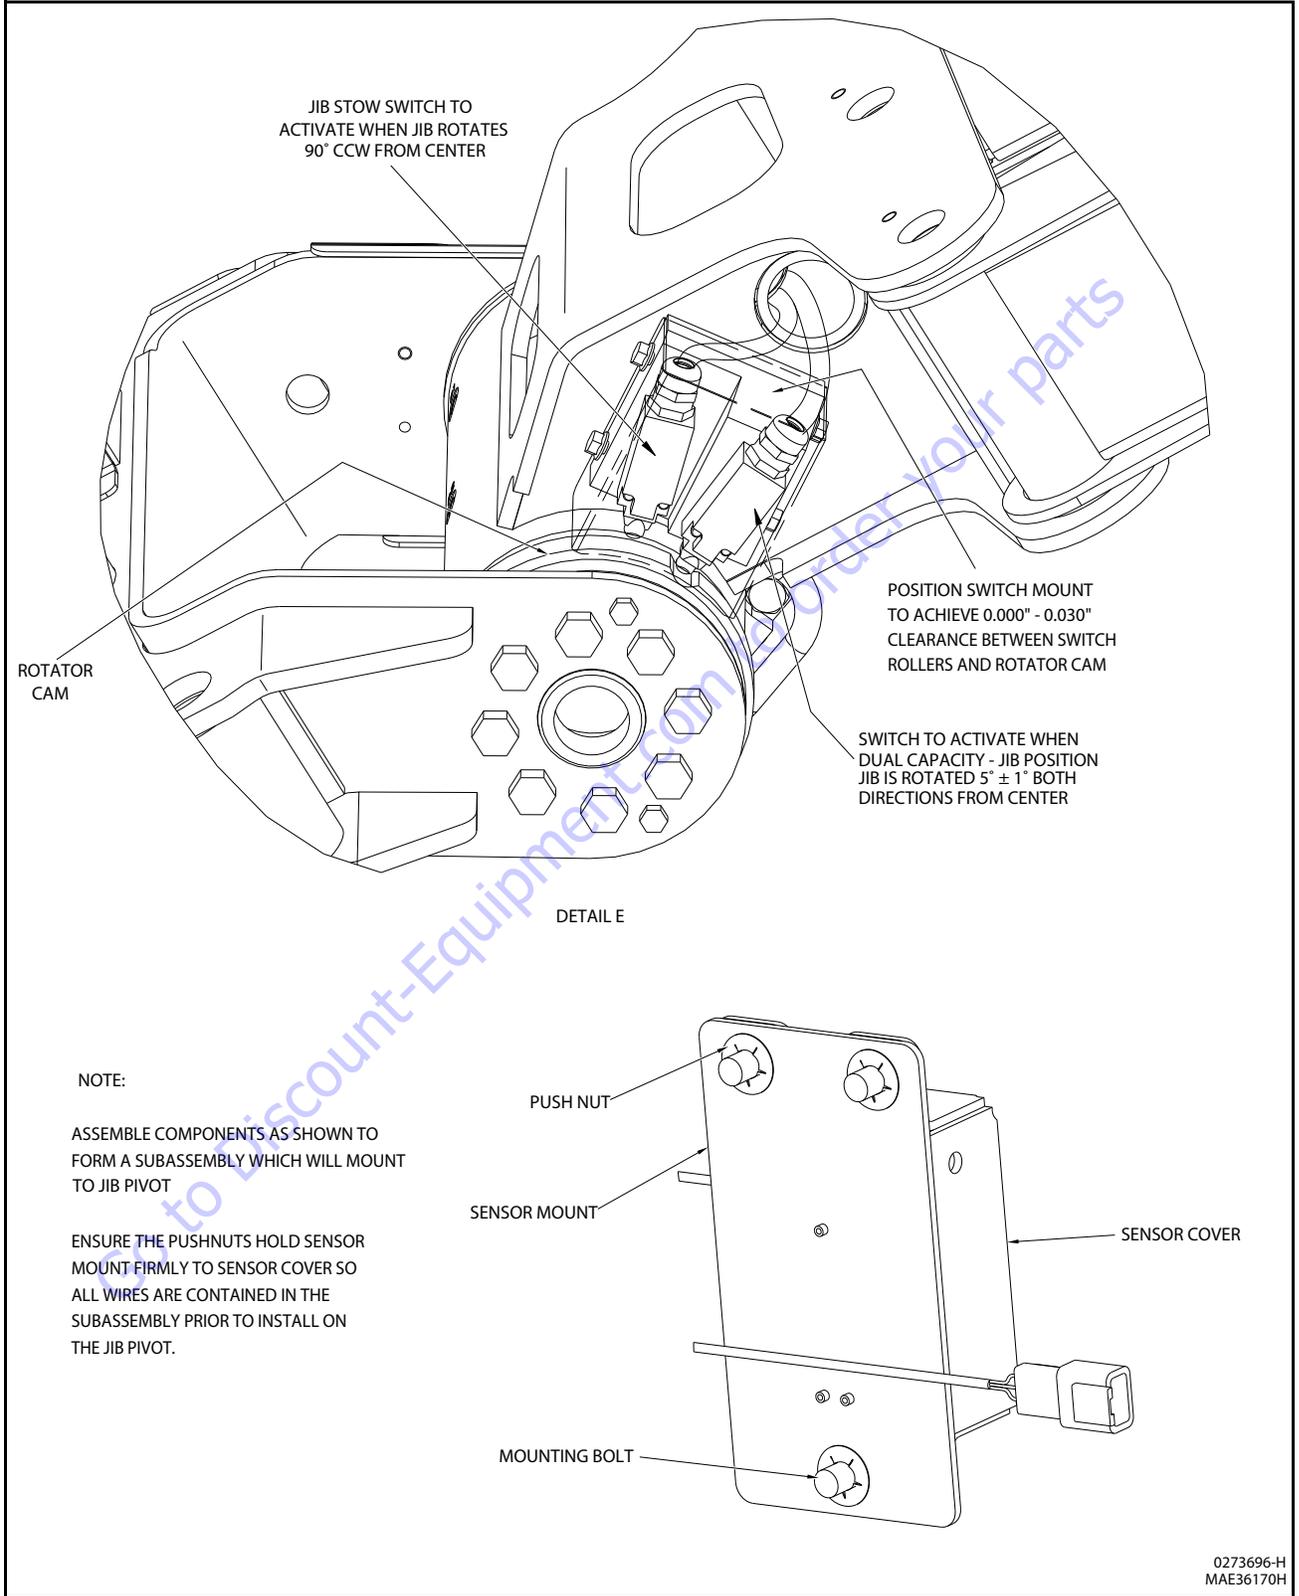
Boom/Jib Sensors and Switches Installation - Sheet 3 of 4
